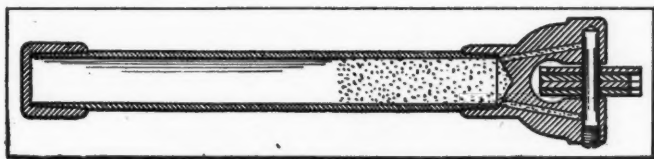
Sectional View of "Brandenburg" Grinding Wheel Dresser, showing Provision for Lubrication
